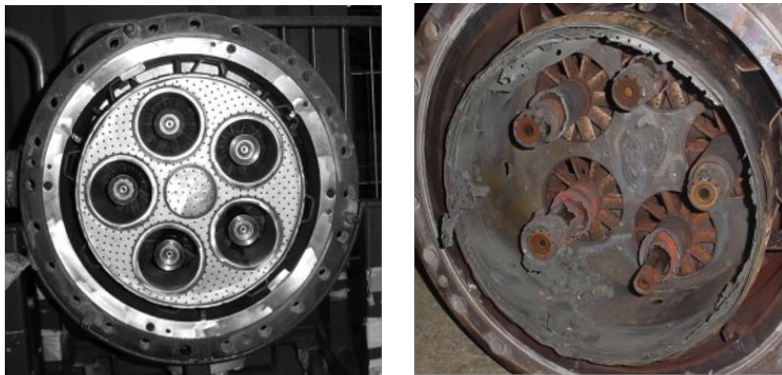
Undamaged gas turbine burner assembly and damaged burner face due to combustion instability. [19]
